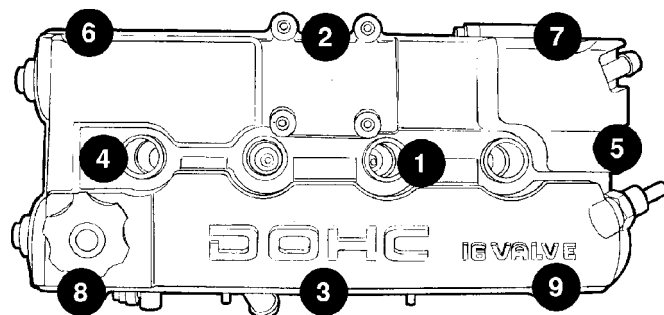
Cylinder Head Cover Tightening Sequence (Typical Cover Shown)
